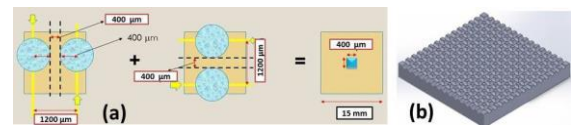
Experimental setup of AWJ machining to produce electrodes
